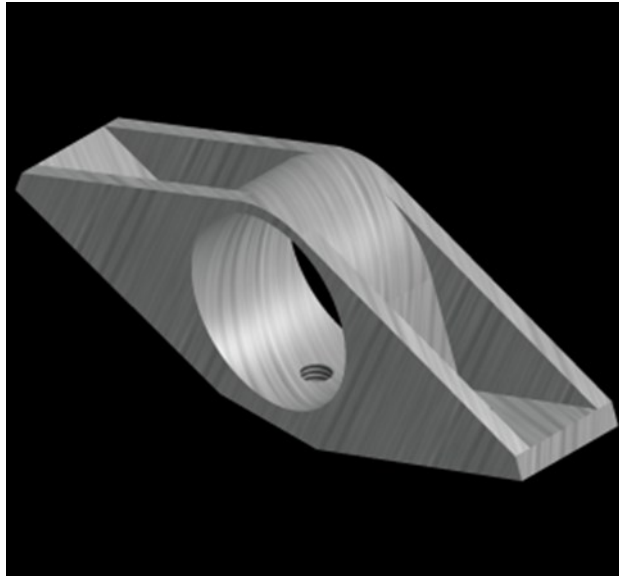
Stabilizing beam. This component is used to tighten the central rod and two micromanipulator holders.
